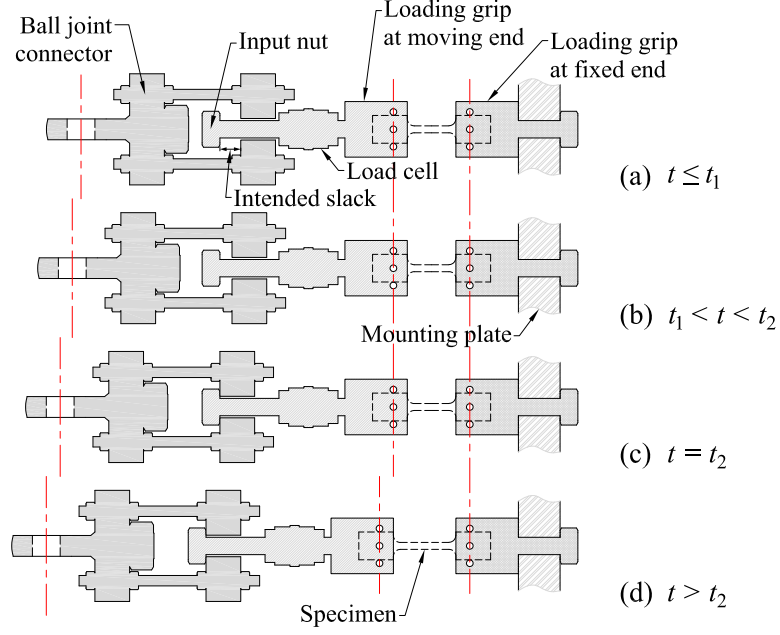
Mechanism of intended slack: (a) ball joint connector started to move, (b) ball joint connector moved freely through the slack distance, (c) ball joint connector engaged with the input nut, and (d) loading grip at moving end started to move.
